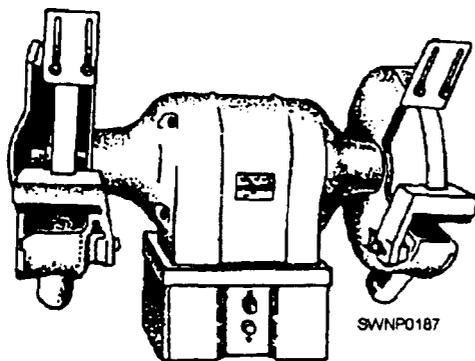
The bench grinder, Eye shields have not been mounted.
